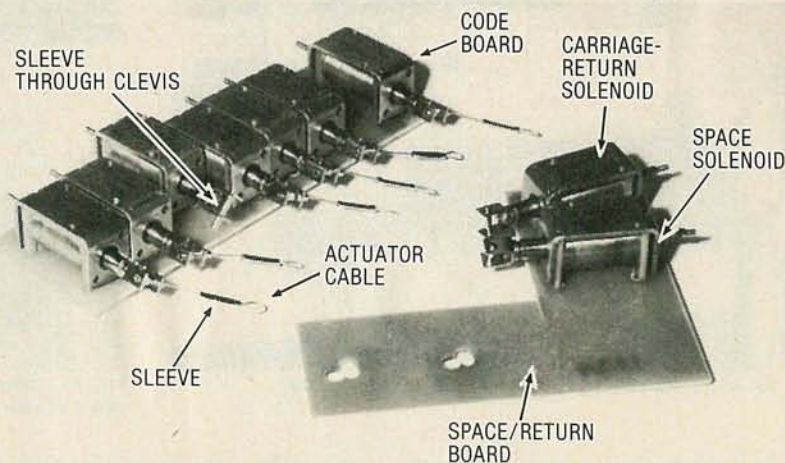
YOUR ASSEMBLED SOLENOID BOARDS should look something like this.
